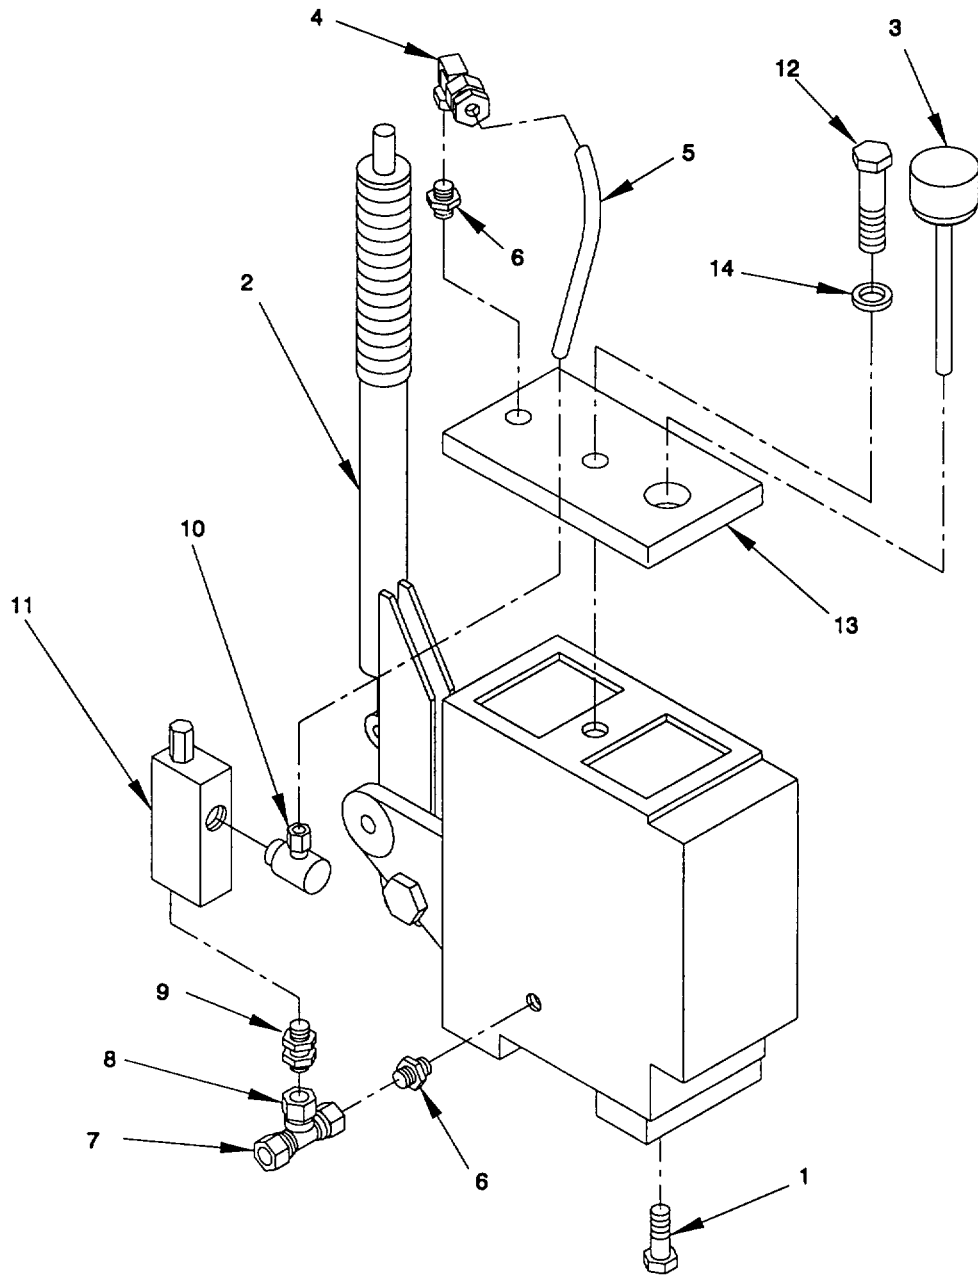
Hydro-Hand Pump, Remove/Repair/Install
